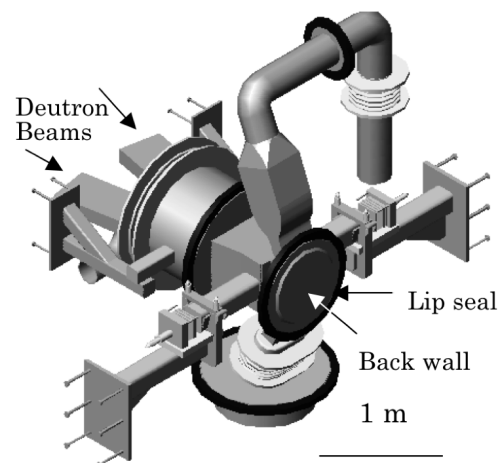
Three Dimensional View of Target Assembly and Backwall.
